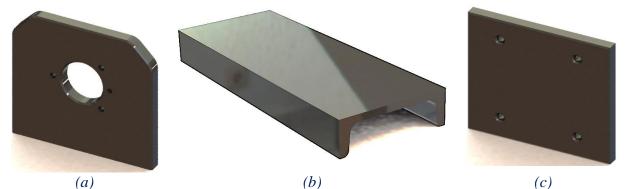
The fixture support is made by welding (a) the front plate (which is fastened to the nutrunner),(b) the central support plate, and (c) the rear plate (for mounting on the linear system) to the support plate(standard 100mmx50mm U profile).
